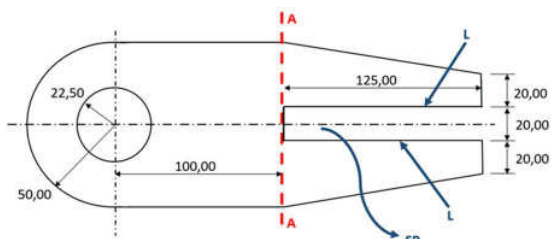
Sketch of an eyebar for connecting the spring plate to the toothed crown pin. Each spring plate has two such eyebars, fillet welded along 'L' to the spring plate ('SP') that fits into the 20mm thick slot represented. The fracture of these auxiliary plates occurred always along the path schematically indicated by the interrupted line 'AA'.
